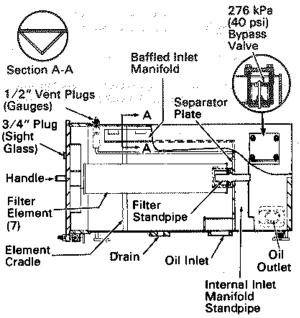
Lubricating Oil Filter, Cross-Section
